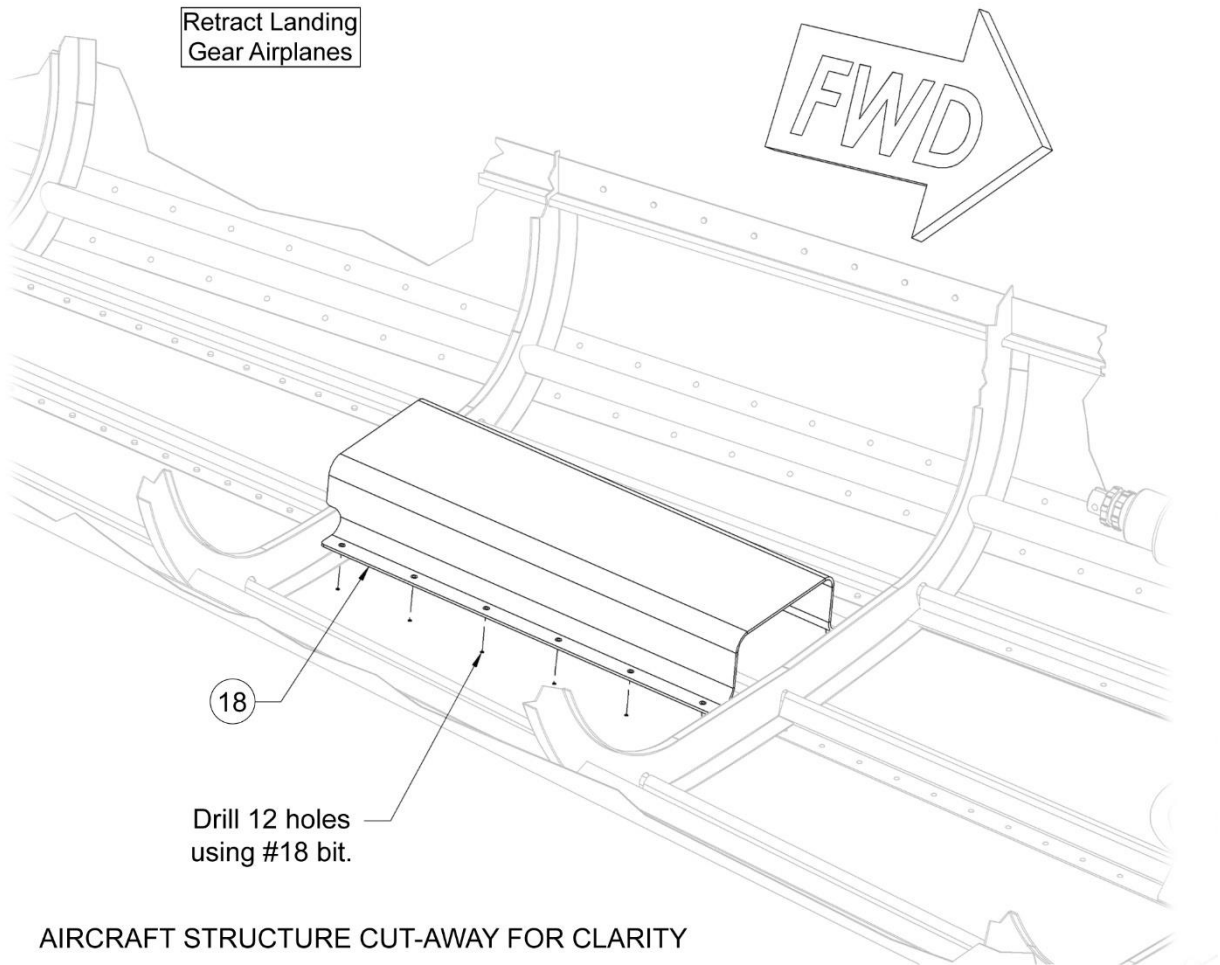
Drilling Holes for Pitch Servo Base Bracket
